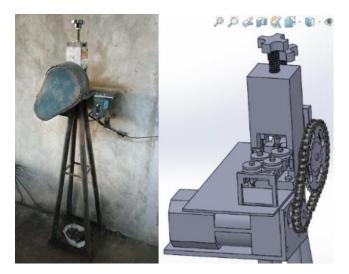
Real machine vs. Final design with integration of engine and transmission components
